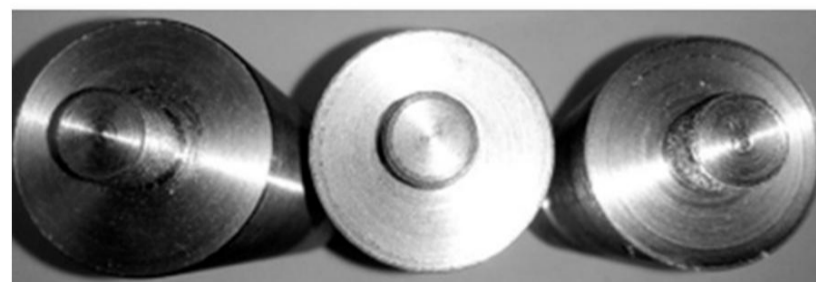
The tools used by geometry of the threaded pin (Tool shoulder diameter)
